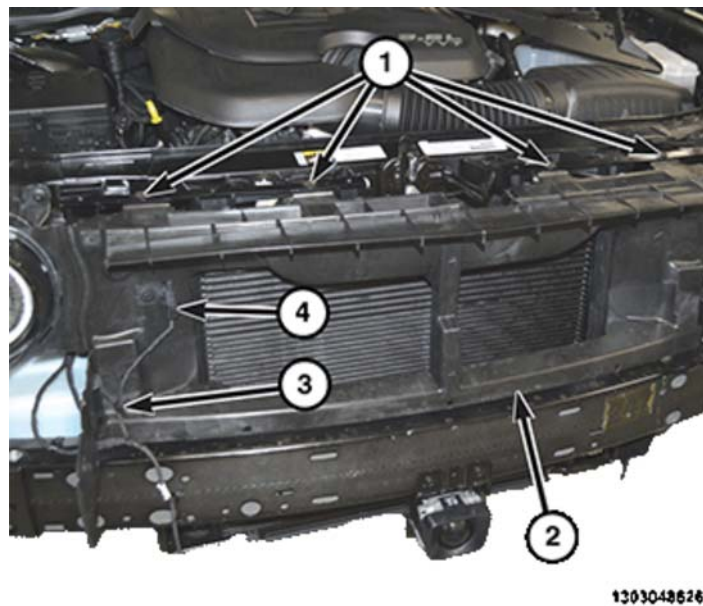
Push-Pin Fasteners, Wire Harness, Support & Connector
